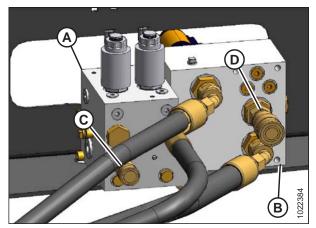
Valve Blocks without Reverser Valve Configured for Auger Header
